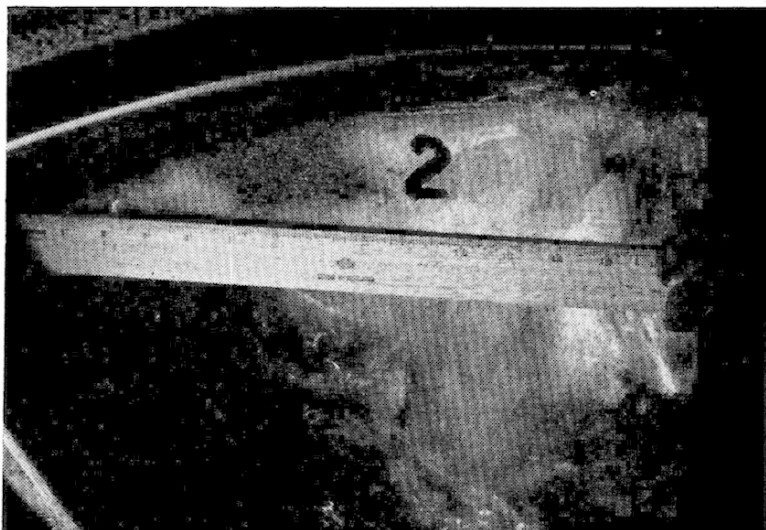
SLIGHT CAVITATION DAMAGE ON NO. 4 STORAGE PUMP UPPER SUCTION IMPELLER BLADE
